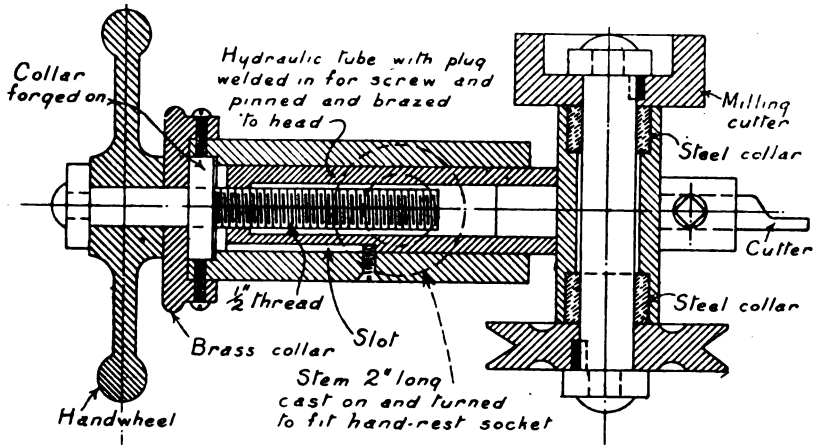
SECTIONAL PLAN OF BOLT AND NUT SHAPING ATTACHMENT FOR THE LATHE.
